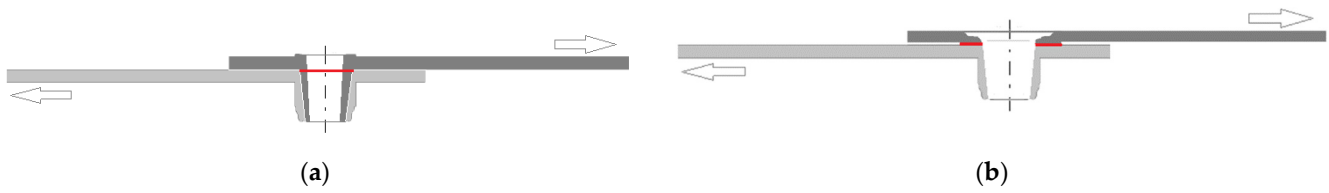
(a) Schematic diagram of the failure of a fit joint by shearing of the inner bushing, (b) Schematic diagram of friction joint failure. The shear plane is marked in red. The arrows indicate the direction of the load.
